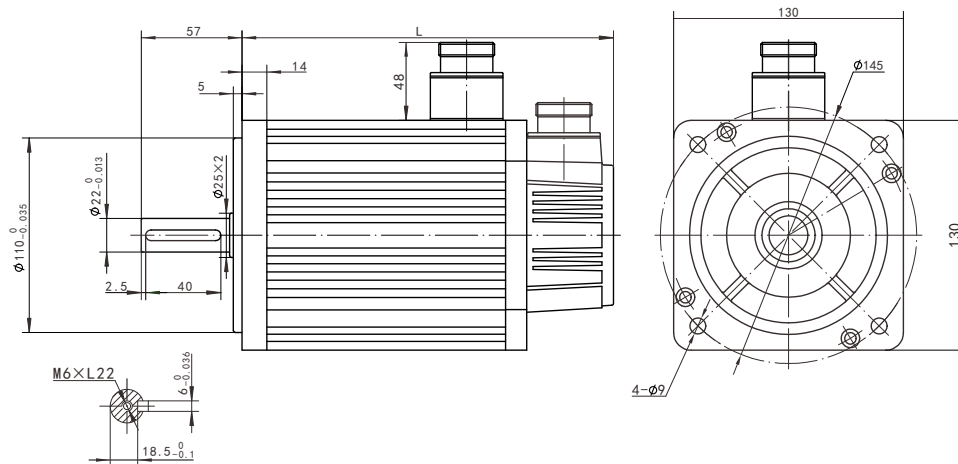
Installation dimension drawing of WE series 130 flange servo motor
